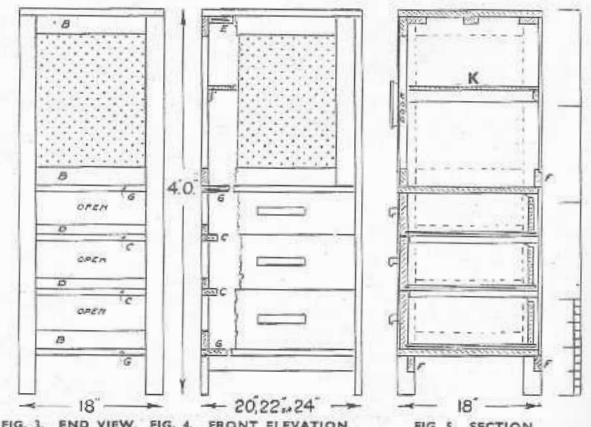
END VIEW. FIG. 4. FRONT ELEVATION. FIG. 5. SECTION
